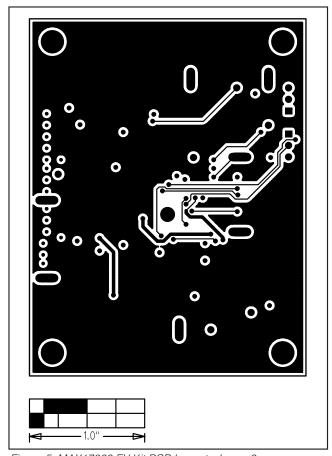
MAX17020 EV Kit PCB Layout—Layer 3 (PGND/Signal Layer)
